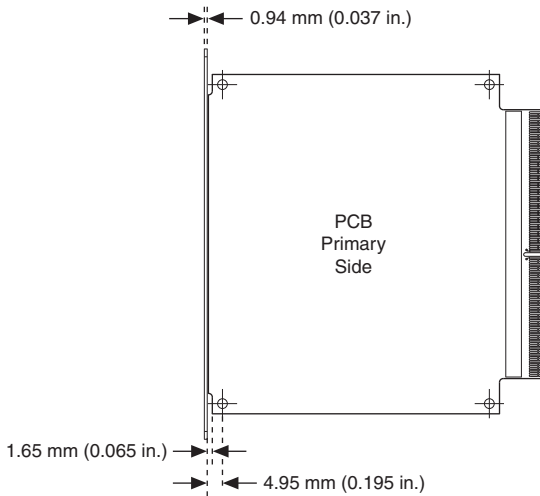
and 7-7 show the module enclosure front panel dimensions in relation to the PCB dimensions and placement.
